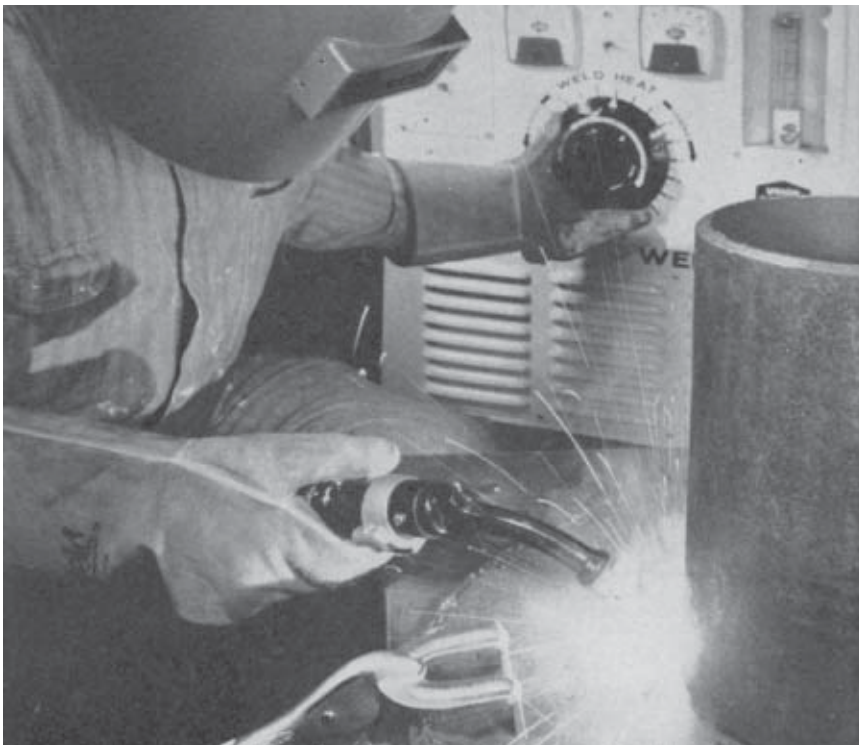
An operator is shown adjusting the welding conditions by use of one-knob control. This welding machine for short-circuiting arc welding was characterized by preset inductance and slope as well as automatic correlation of open circuit voltage and electrode feed rate through adjustment of a single control knob. (From “The ‘One Knob Welder’” by A. F. Manz, which appeared in the September 1968 Welding Journal.)
